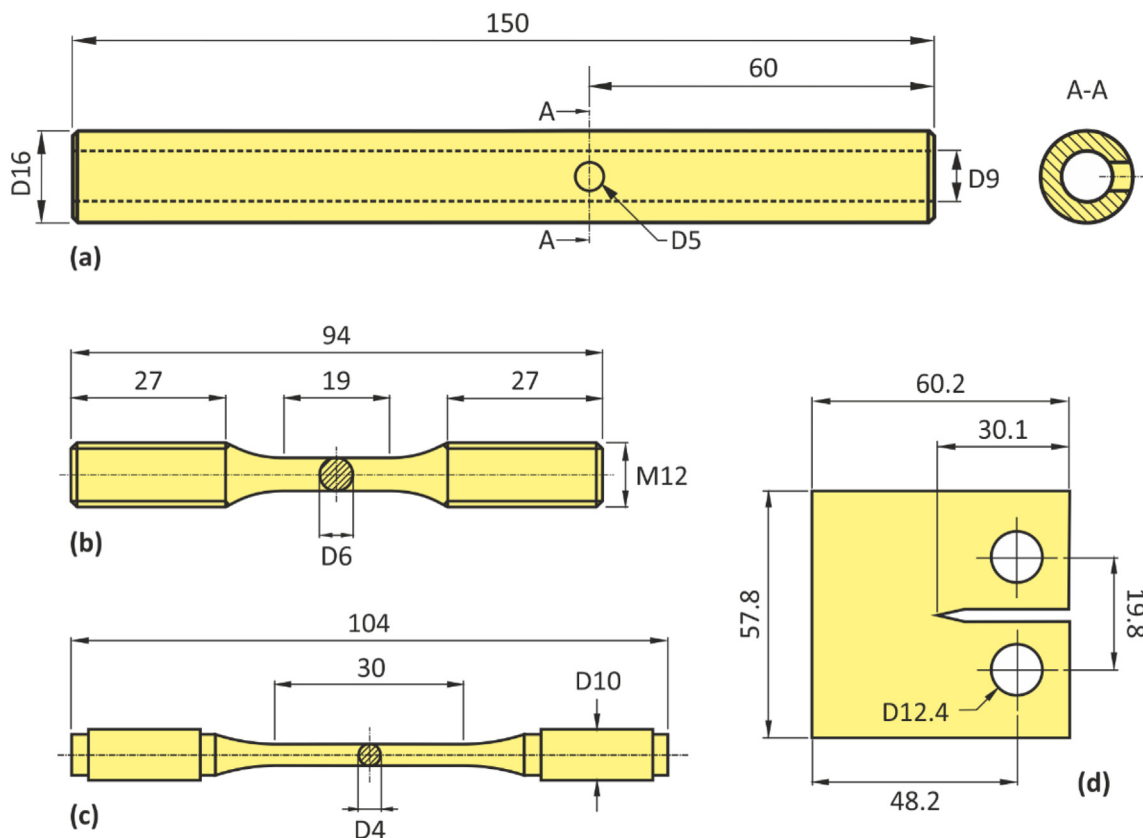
Specimen geometries used in the experimental campaign: (a) multiaxial fatigue tests; (b) low-cycle fatigue tests; (c) high-cycle fatigue tests; and (d) fatigue crack growth tests (dimensions in millimetres).
